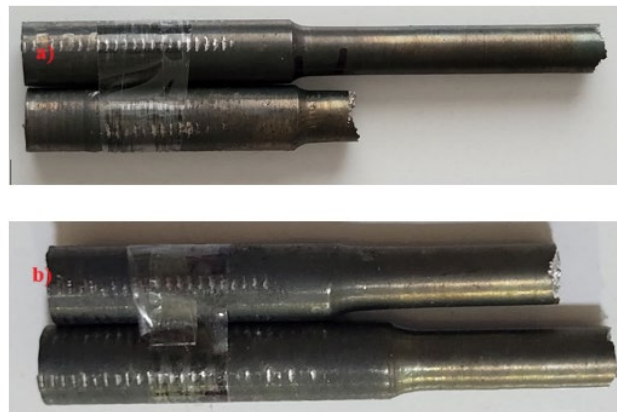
Fracture location of metal mould castings tensile test. (a) Sample 1, (b) Sample 2.
